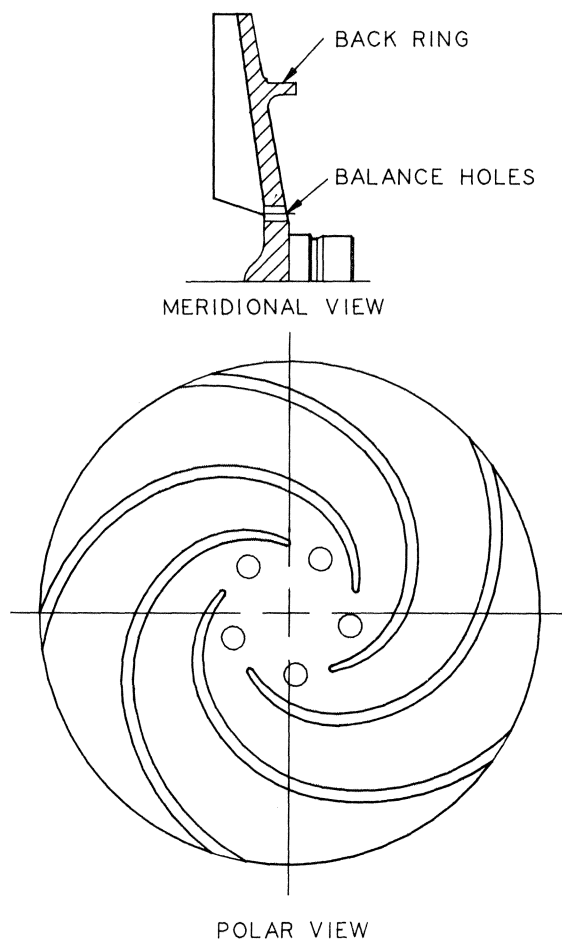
Full Back Shroud Semiopen Impeller with Back Ring and Balance Holes.
